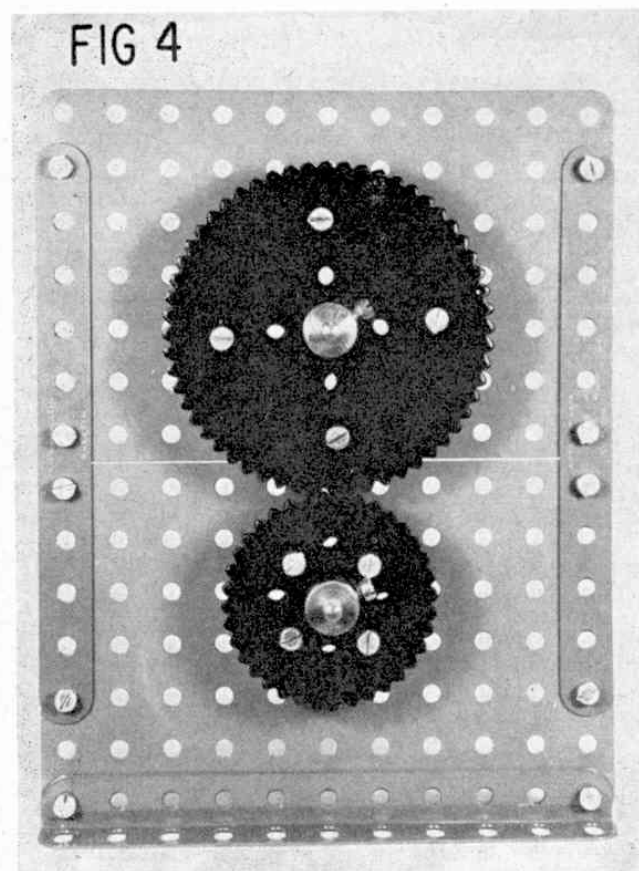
Pulleys, sprockets and gear wheels in combination to operate an accurate programming mechanism. Fig. 4. Meccano Sprocket Wheels paired-up to give direct meshing as heavy duty spur gears. Fig. 5. Range of pinions and gear wheels giving four different ratios ranging from 1 : 1 to 4 : 1.
